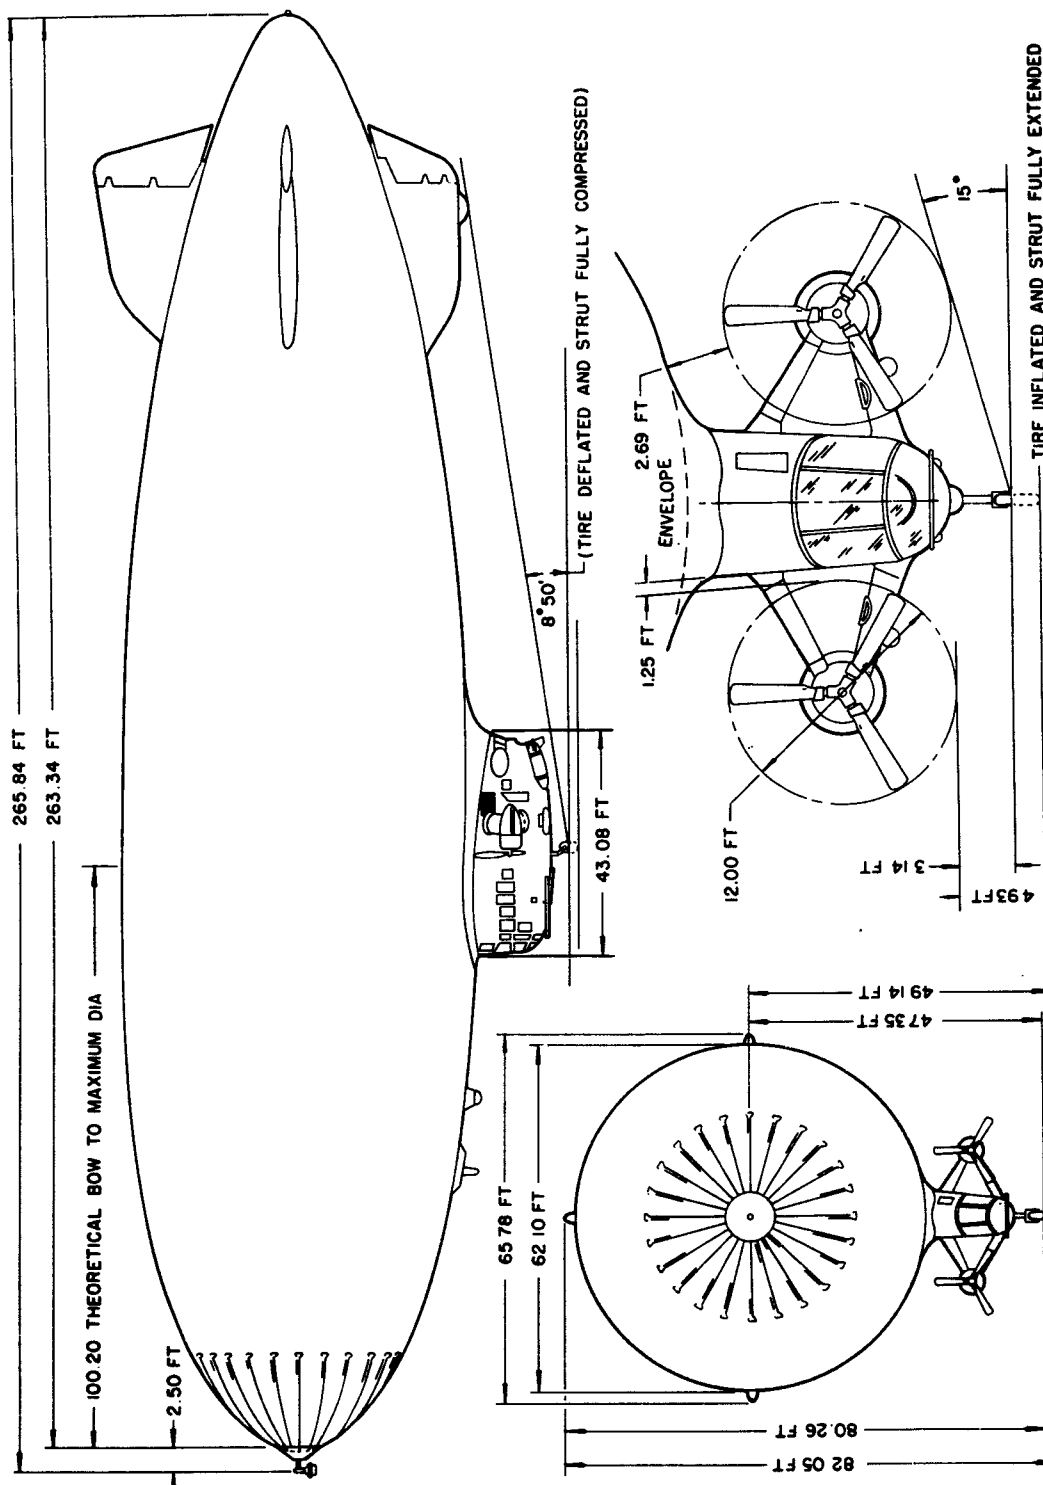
Principal dimensions of Model Z9G-3 airship.
